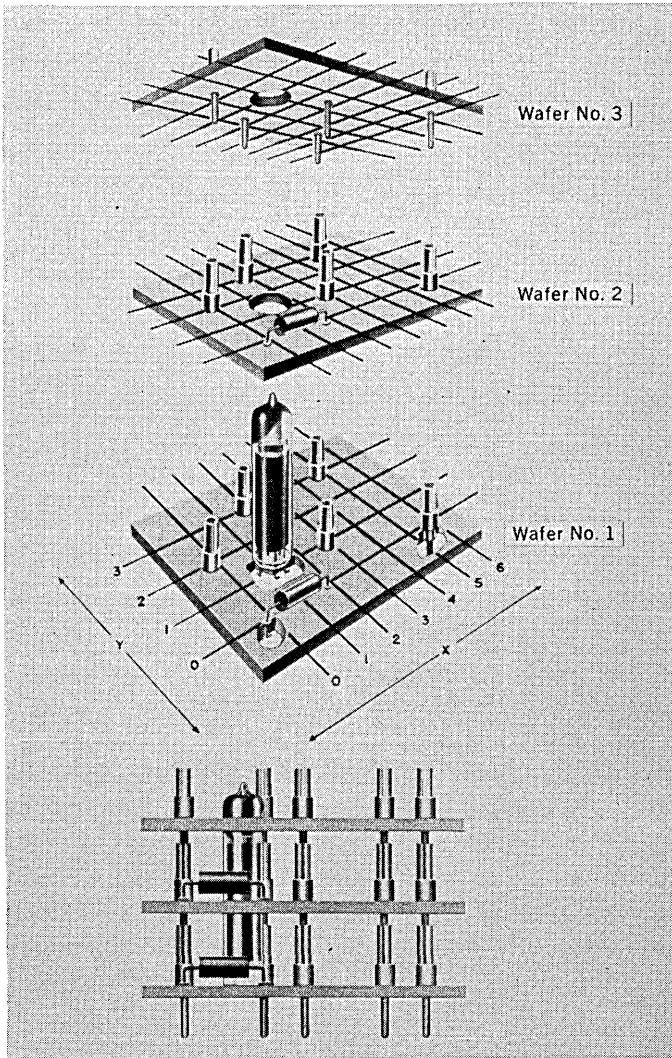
Partially assembled unit to show deck construction and tube mounting
